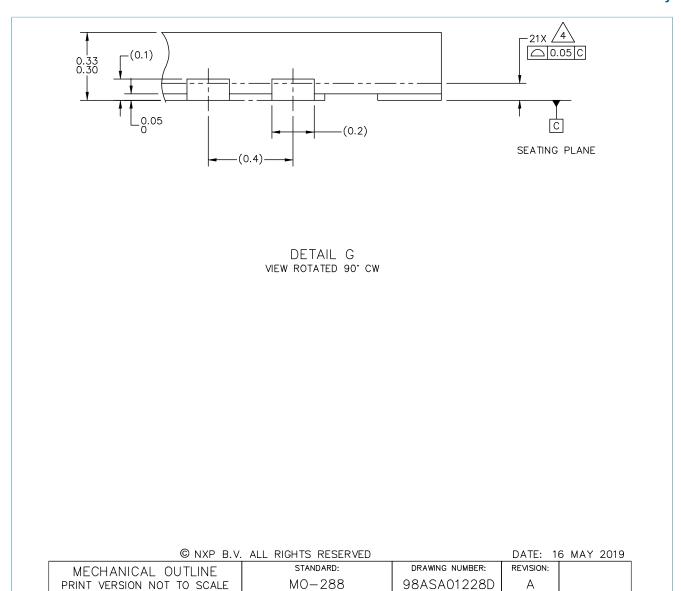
Package outline detail HX2QFN20 (SOT1969-1)
